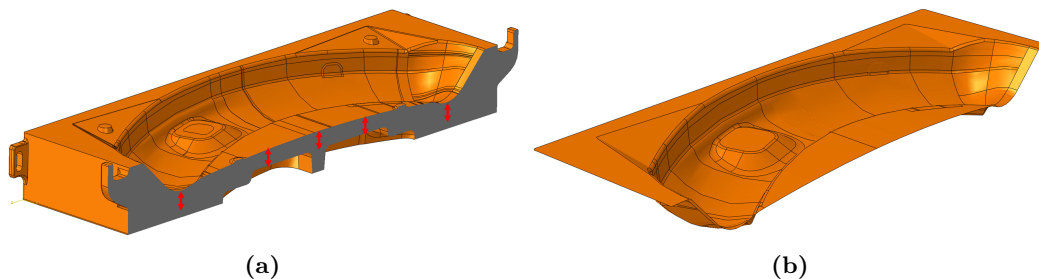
CAD views of the mold: (a) industrial and (b) simplified geometry
